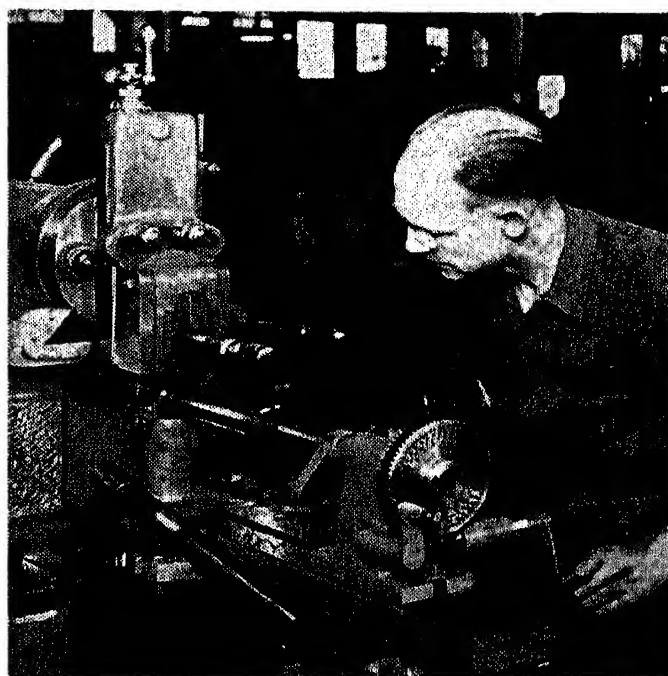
A splined shaft being machined on a shaper with index centers mounted on the table. (Courtesy The Cincinnati Shaper Co.)
